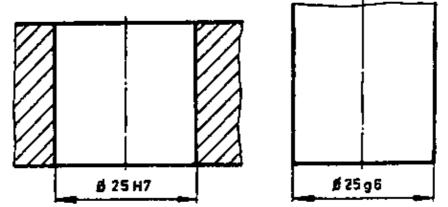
Entry of designations of fits in detail drawings indicating the dimensions of fits
